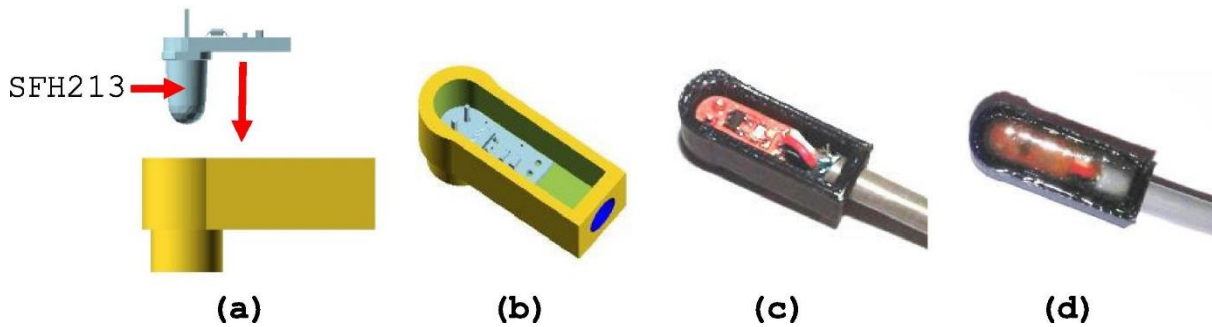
a) CAD model showing the photodiode amplifier PCB insertion into the module housing. b) A CAD model of the PCB located in the housing. c) The actual photodiode amplifier located in the 3D-printed module housing with cable attached. d) The module potted with epoxy resin.
